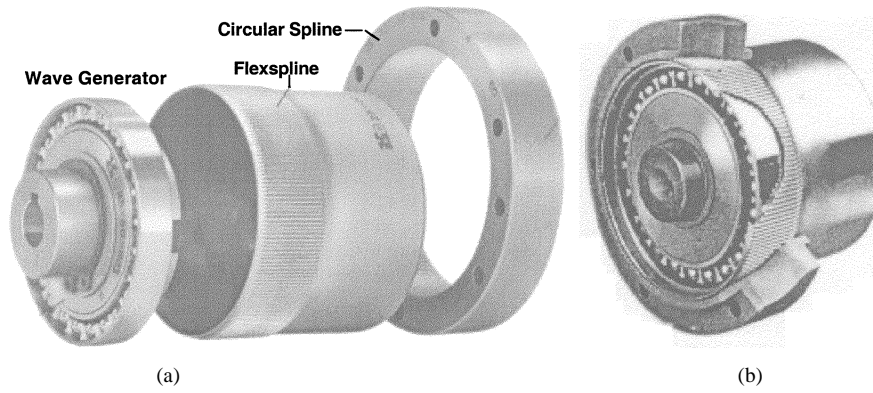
(a) Harmonic drive gear components and (b) assembly [1].
